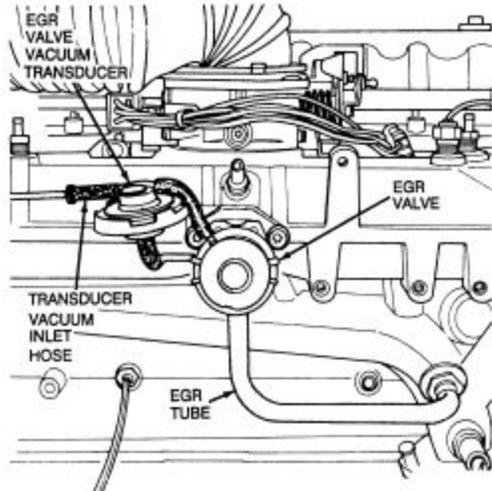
View of a 4.0L engine with an EGR valve and a vacuum transducer
